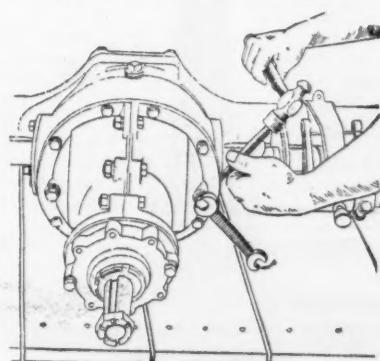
Forcing bevel pinion in by rotating adjusting ring in the left hand direction
